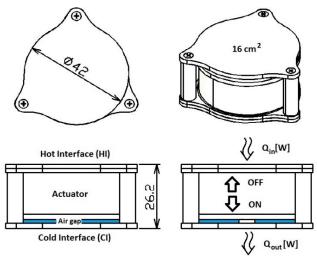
Space Heat Switch specimen (dimensions in mm).
